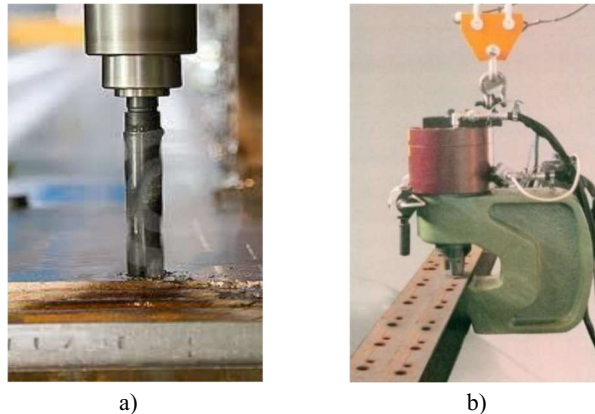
Example of hole (a) drilling and (b) punching (Marmo, 2011).
